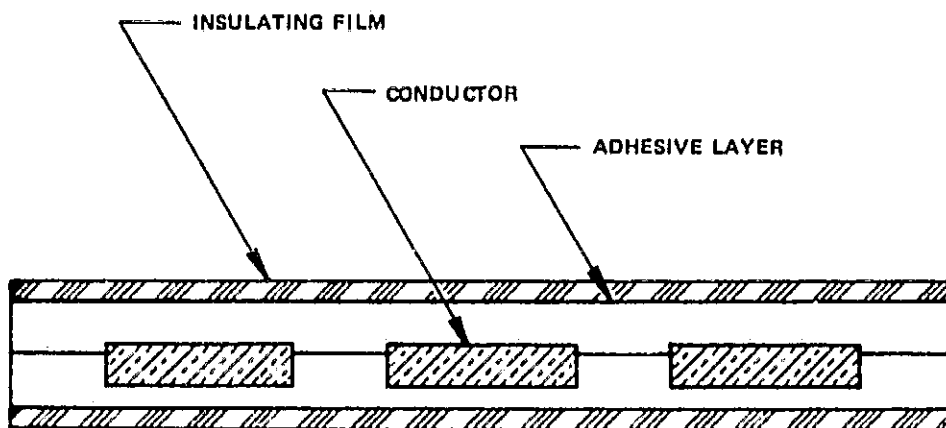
Typical cross section of FCC manufactured with unsymmetrical layers of insulation.
